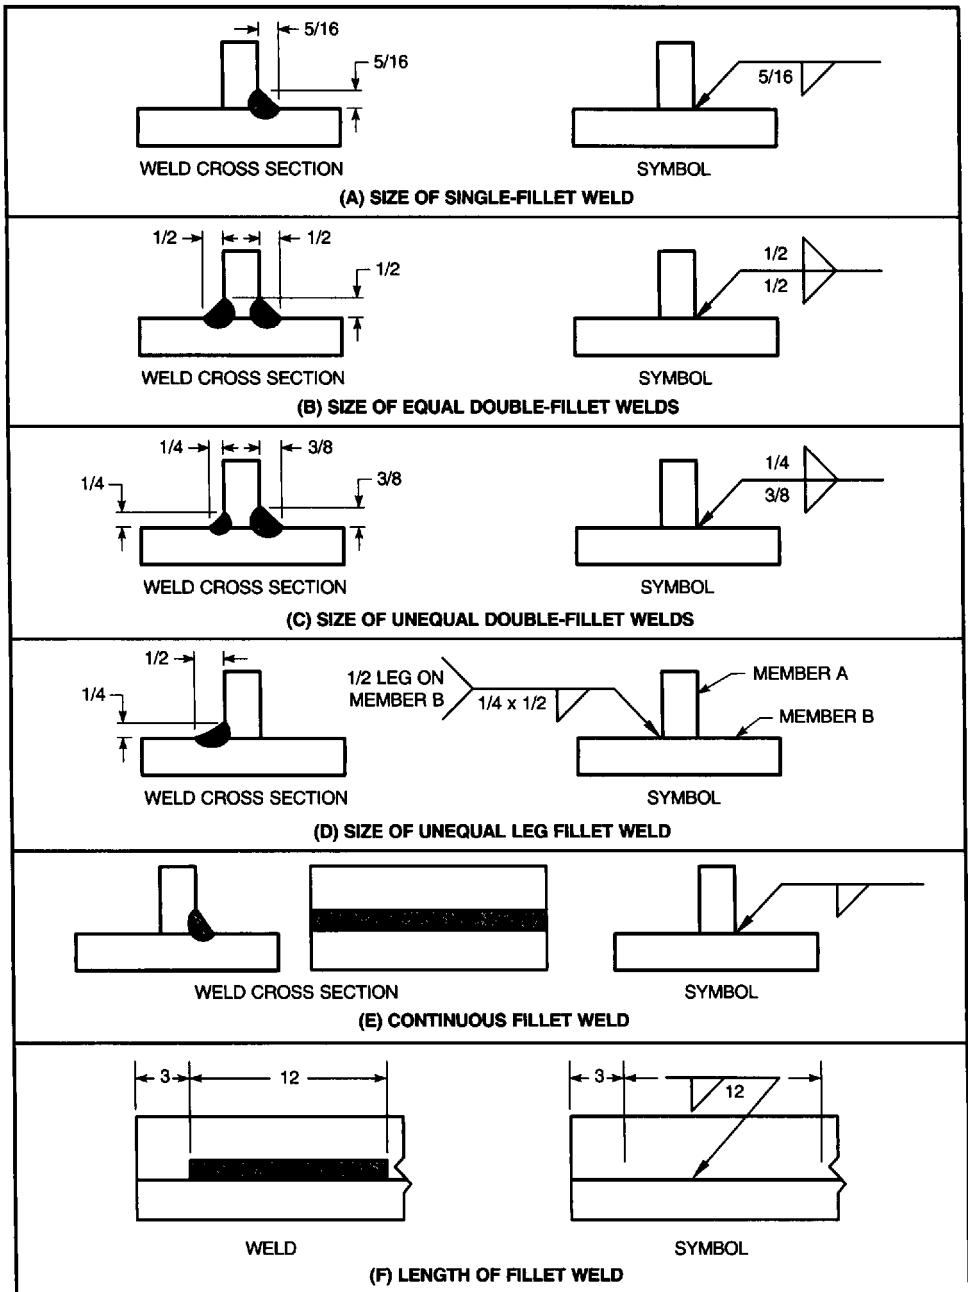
Examples of Typical Fillet Welds Showing the Corresponding Symbols and Dimensions
